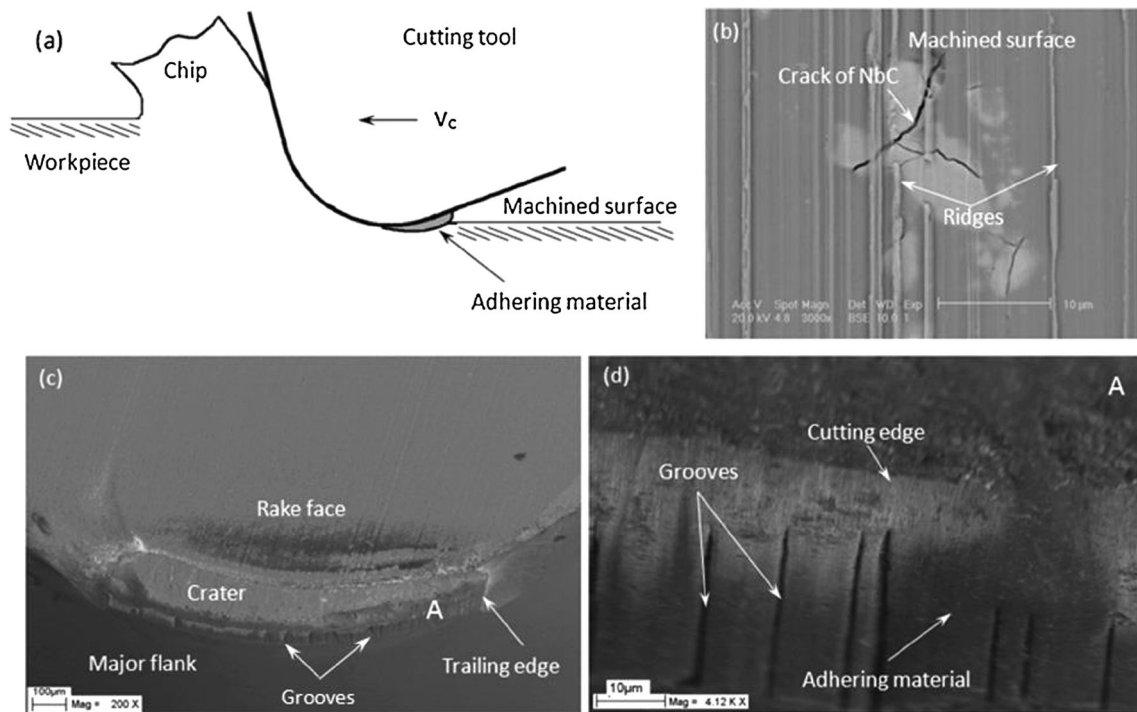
(a) A schematic diagram showing the mechanism of ridge formation; (b) ridges located on the machined surface; (c), (d) grooves located on the tool flank face [134]
